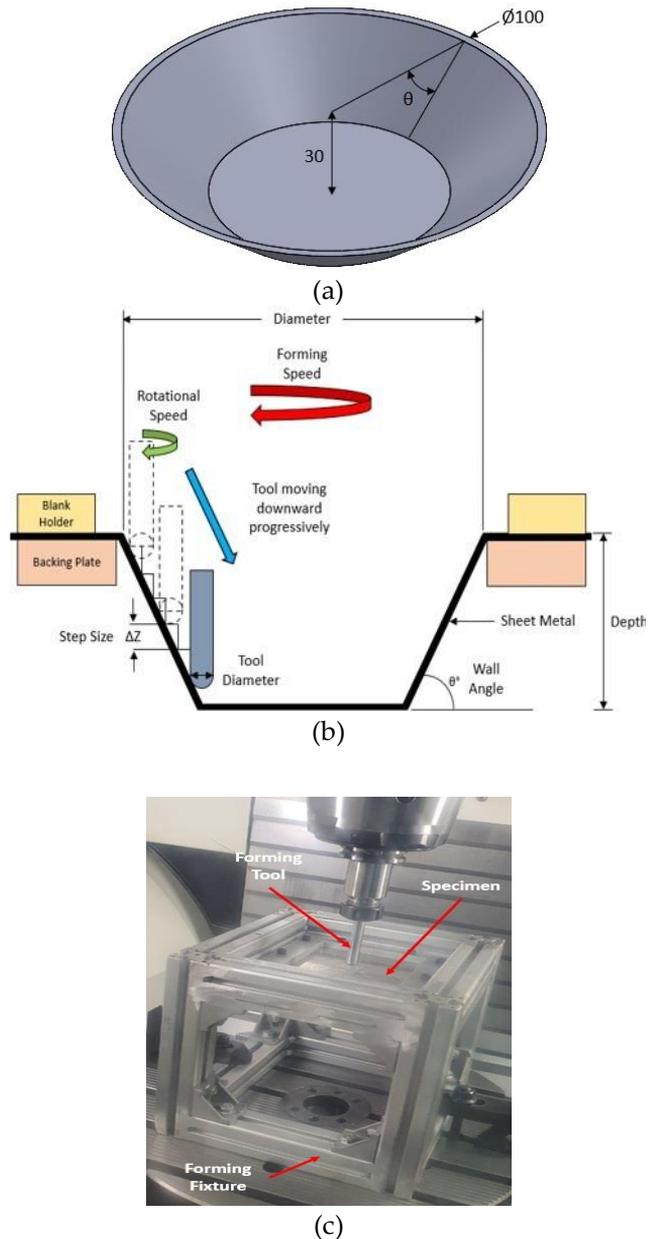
(a) CAD design of experiment, (b) Illustration of SPIF working principle and (c) Location of FSWed blanks on forming fixture in 5-axis CNC machine
